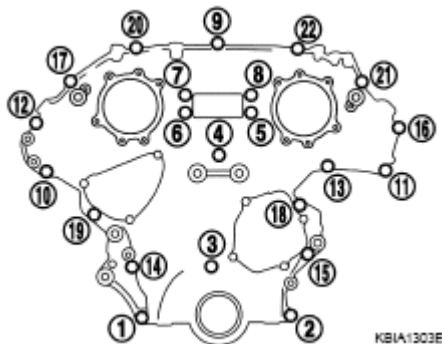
Identifying Loosening And Tightening Front Timing Chain Case Bolts In Sequence
